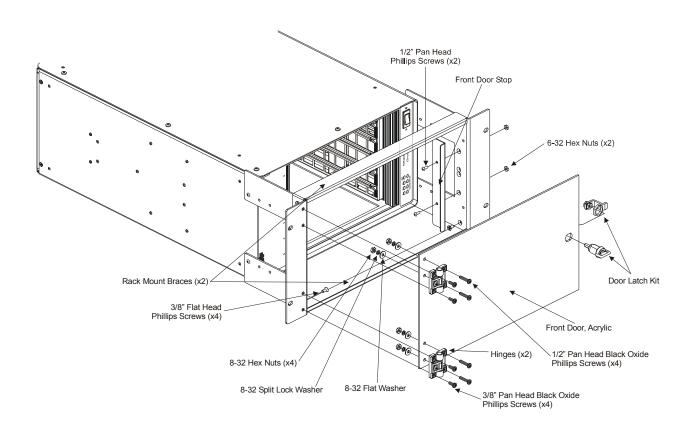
ACRYLIC RACK DOOR INSTALLATION DIAGRAM
